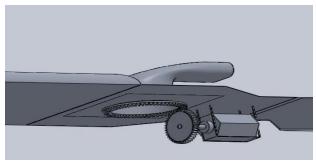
, The mechanism of the bow thruster drive with an electric motor (isometric view)
